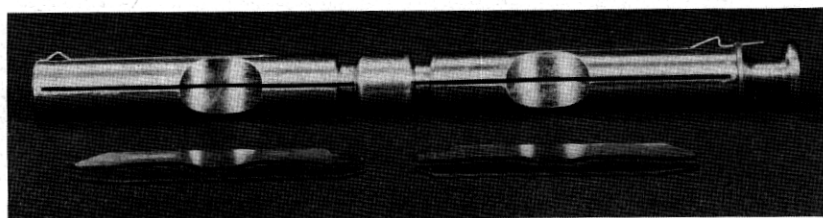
Double spindle showing slots and complement of two sets of die blades.
